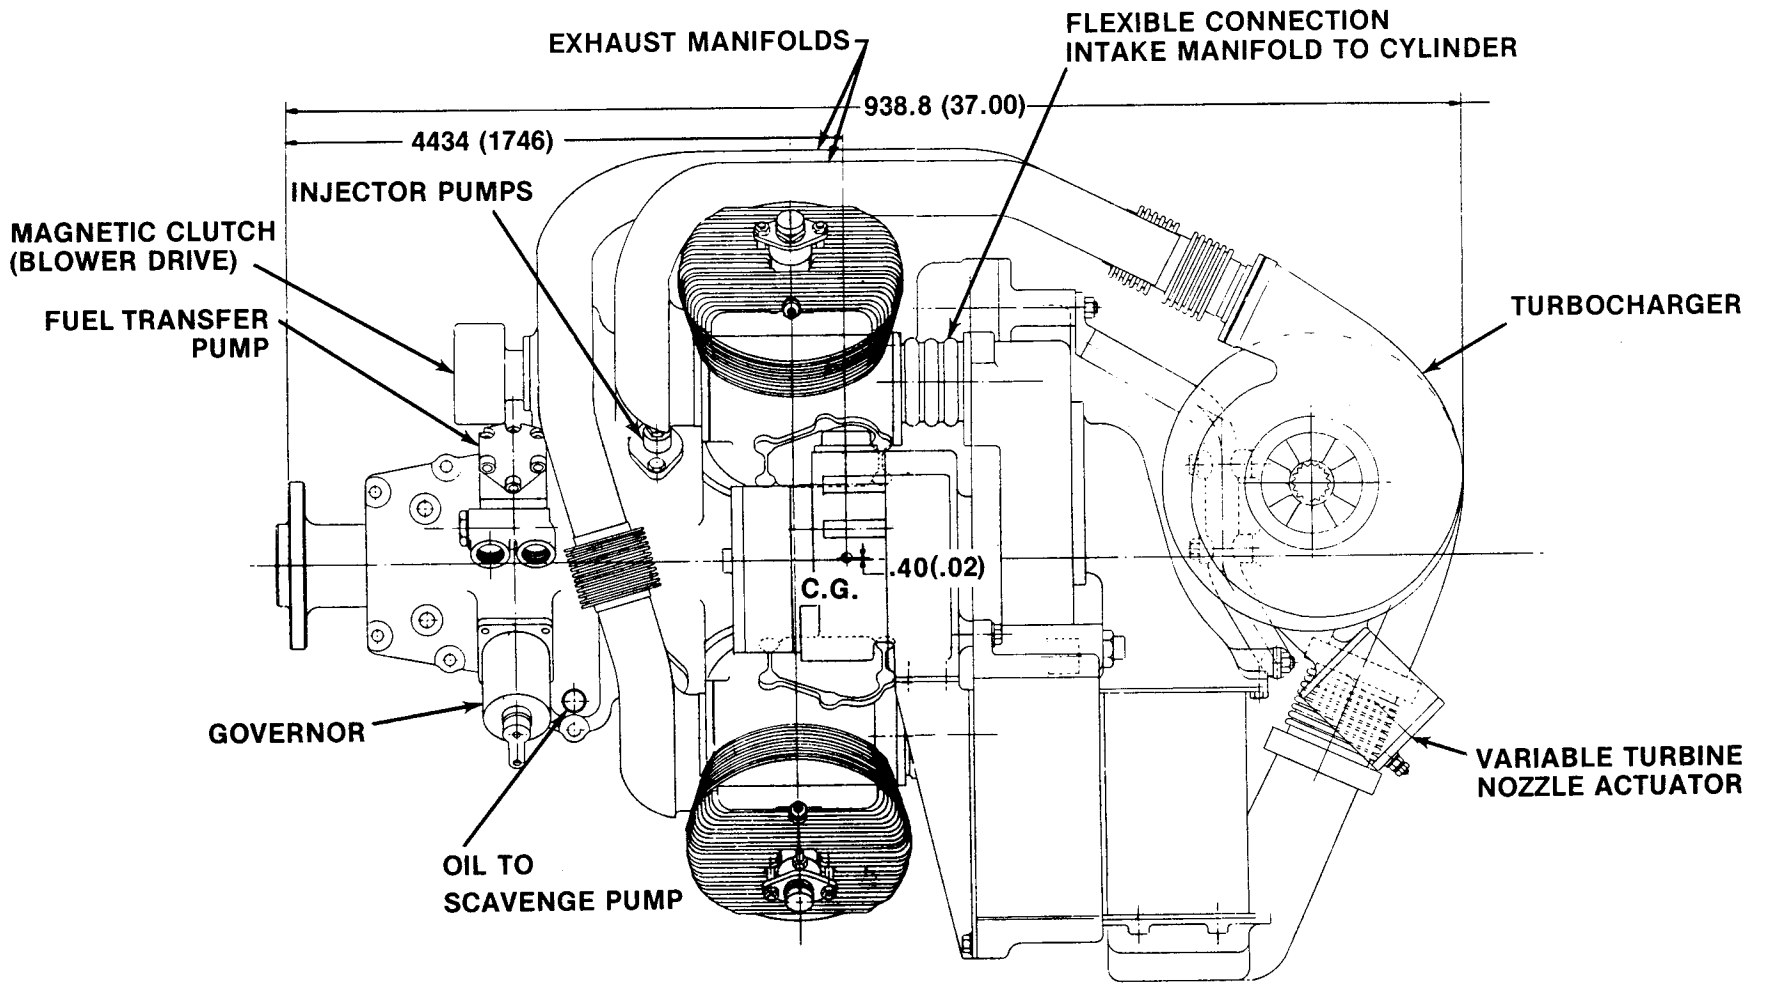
149 kW AIRCRAFT DIESEL—SIDE VIEW
